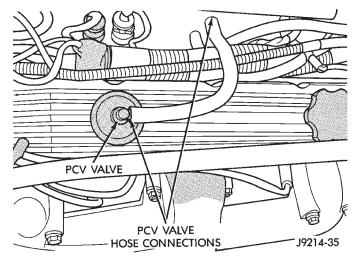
PCV Valve Hose Connections—5.2L/5.9L Engines—Typical
